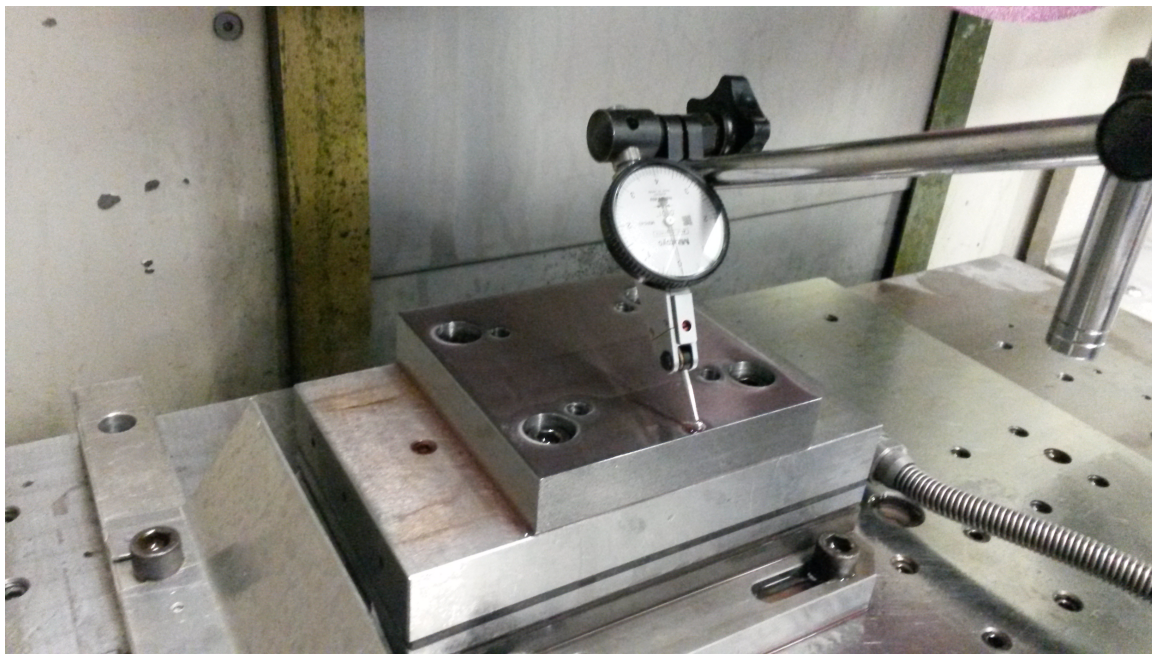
Steel specimen for kinematic error compensation validation inside the grinding machine, mounted to the force dynamometer.
